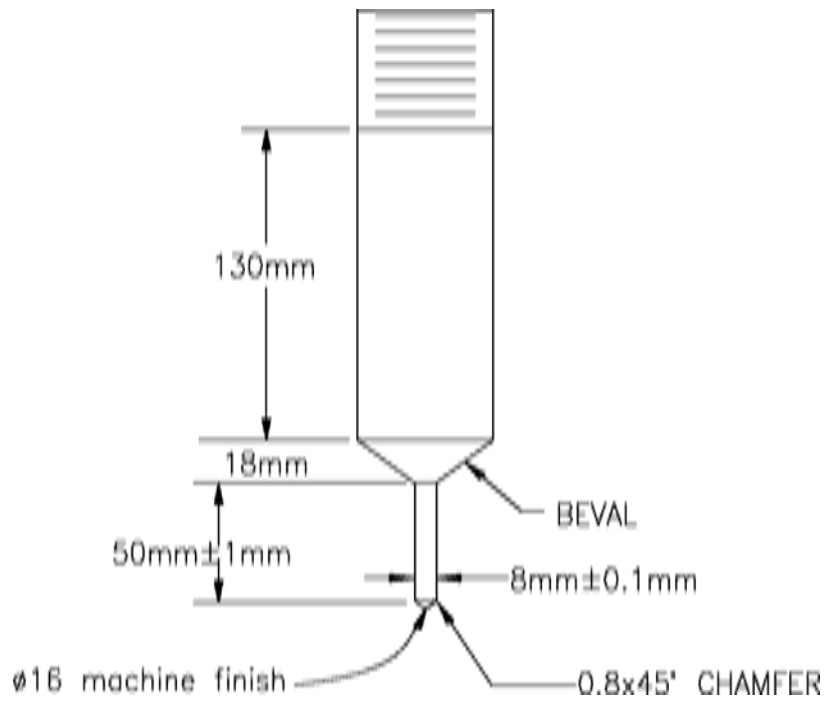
TEST PROBE DETAIL (NOT TO SCALE)
